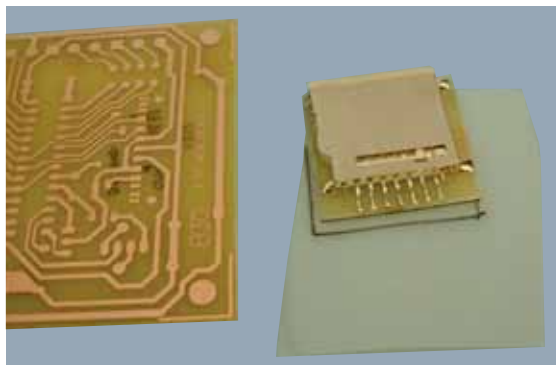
Cut an insulator to size, using a printout of the daughter board (or a real one if you have it, like we did!
